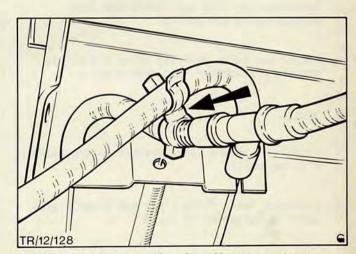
Handbrake cable clip fitted to short wheel base variants.
